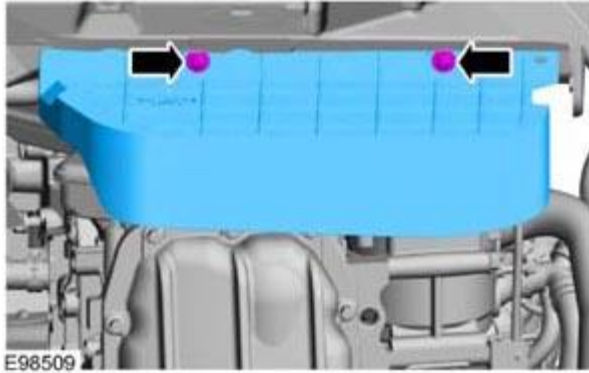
Locating Bolts And Accessory Drive Belt Splash Shield
